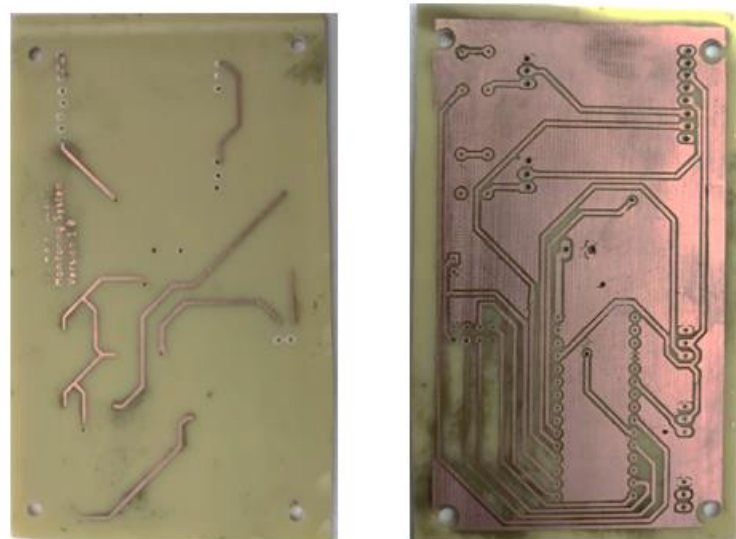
PCB Top View (Left) and Bottom View (Right)
